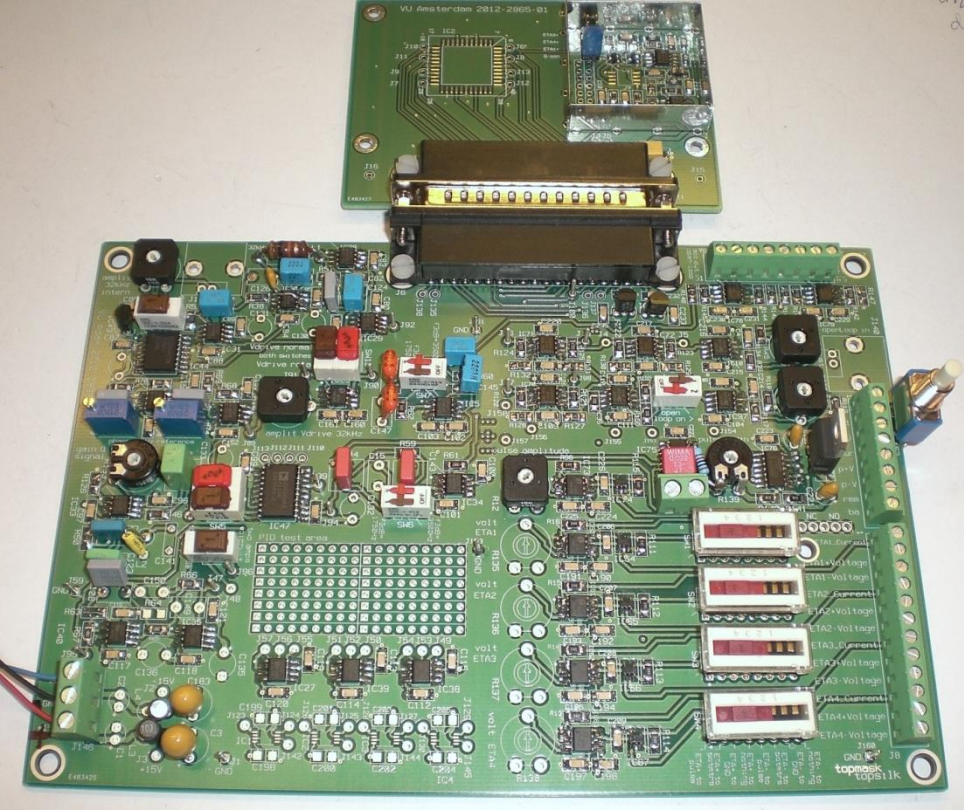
Electronics chip board. Top: in-vacuum board. Bottom: main out-vacuum board.
